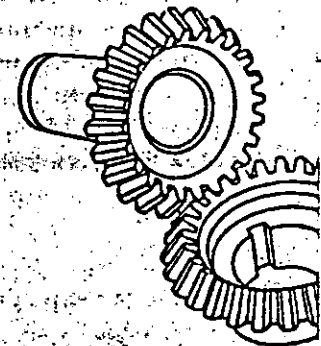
Straight-tooth bevel gears. (From Lubrication, published by The Texas Co.)
